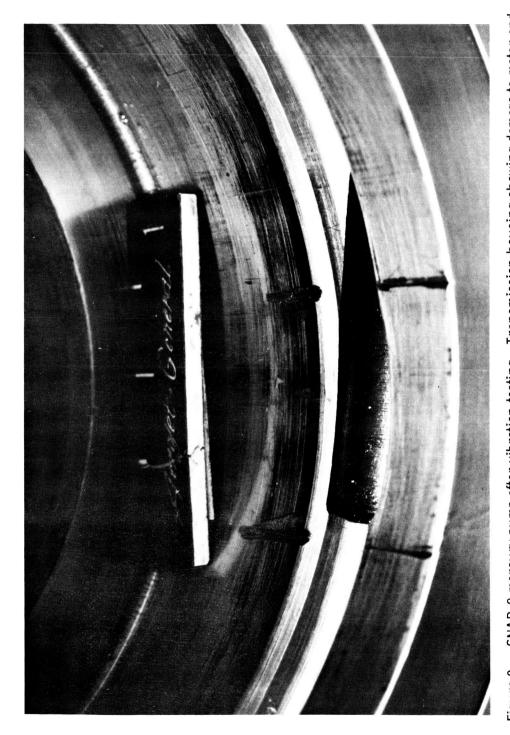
SNAP-8 mercury pump after vibration testing. Transmission housing showing damage to motor end bearing seat.
